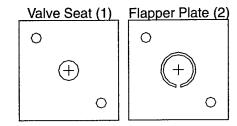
Flapper valve laminates showing pivoting flapper and orifice plate.
